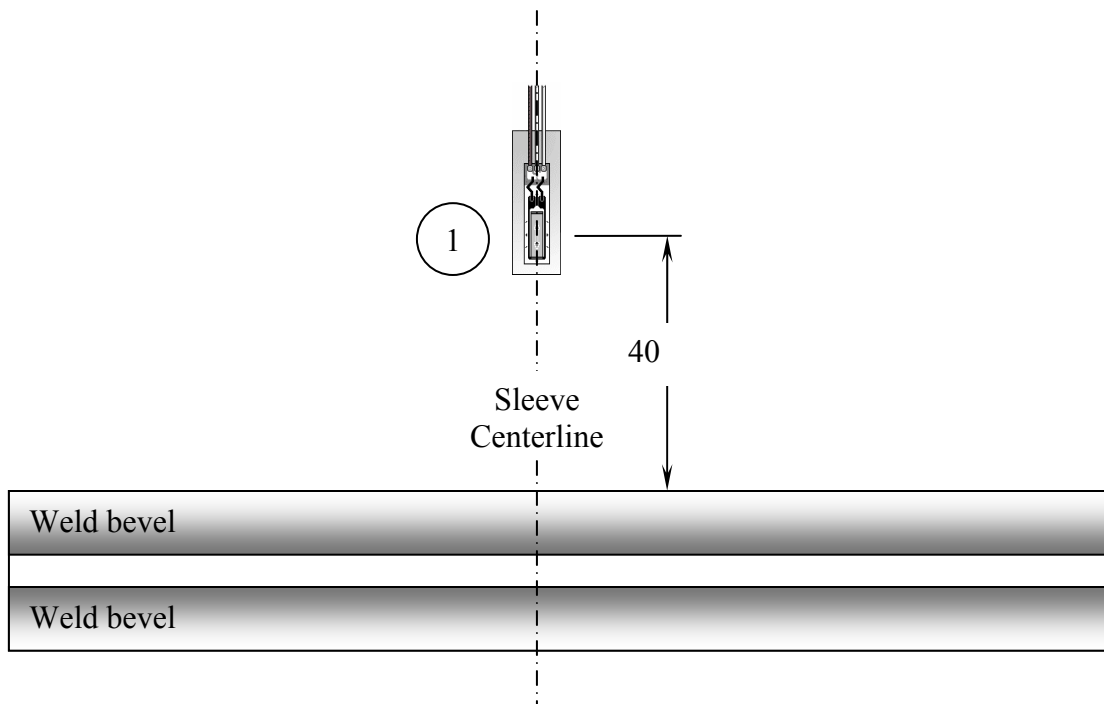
Sketch of Layout of Hoop Gauge 1 on the Sleeve
